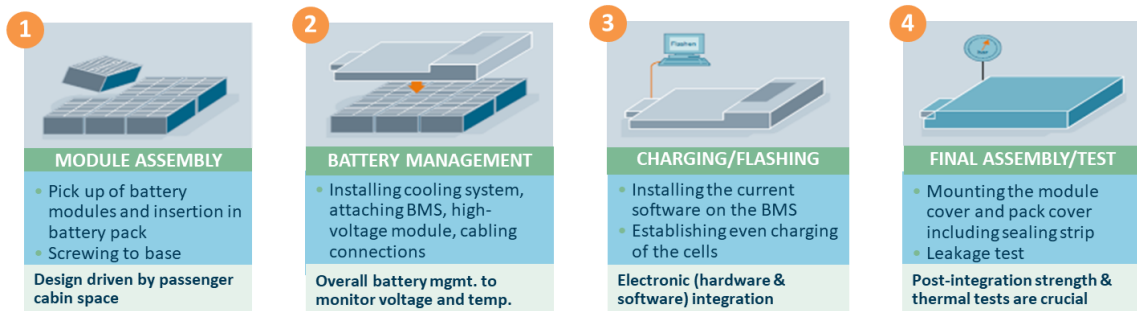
BATTERY MODULE AND BATTERY PACK ASSEMBLY
